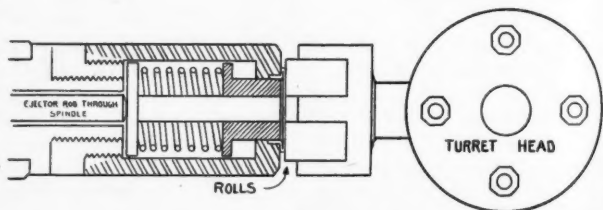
Showing how the rollers spin the flange as the spindle revolves.
